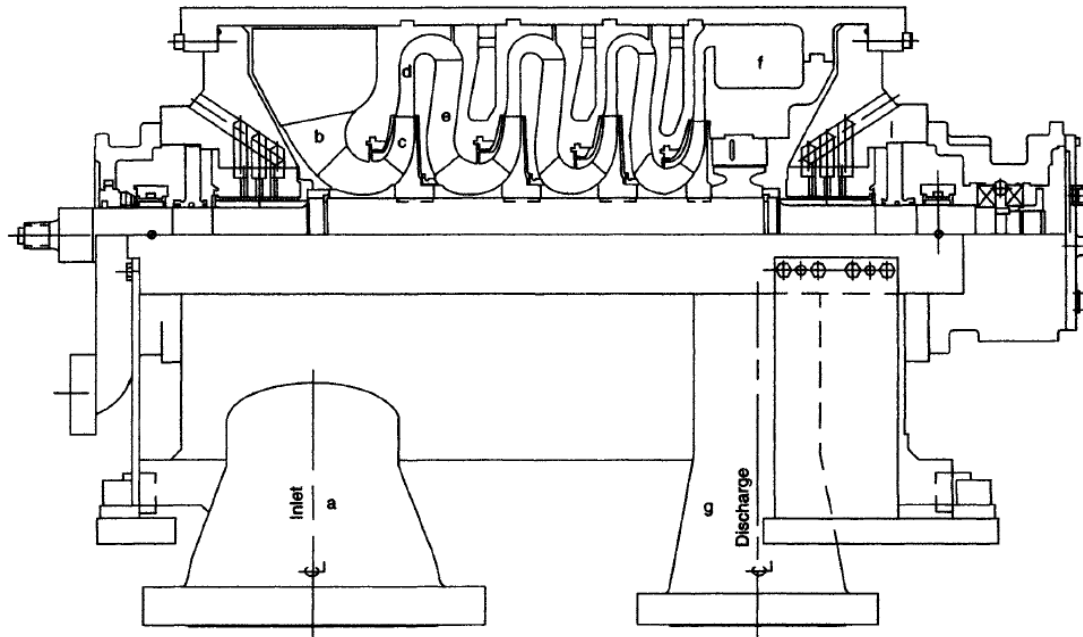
F. Multistage centrifugal compressor : (a) the inlet nozzle, (b) inlet guide vanes, (c) impeller, (d) radial diffuser, (e) return channel, (f) collector volute, and (g) discharge nozzle [Ref. 28]
